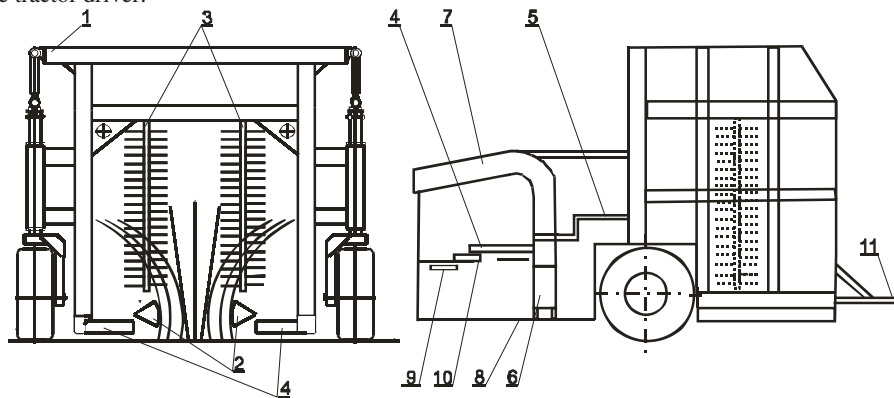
Schema of a raspberry "Natalia" combine harvester: 1- frame, 2- sealing assembly, 3- shaking barrels, 4- fruit openwork-ply conveyors, 5- platform for boxes, 6- ventilator, 7- air channel, 8- platform for servicing personnel, 9- seat, 10 - fruit box, 11- catch
